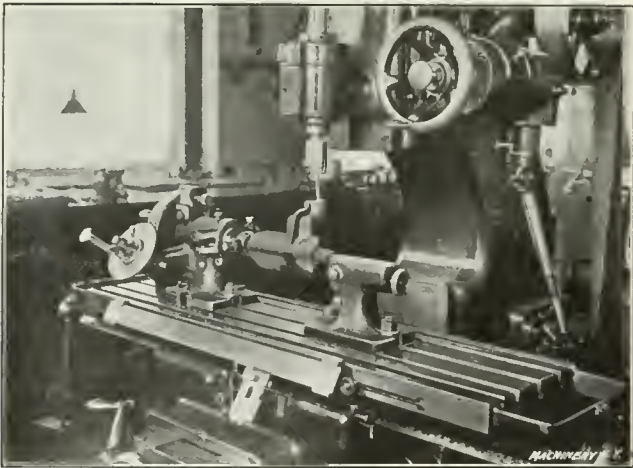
Example of Jig Boring on a Vertical Milling Machine
